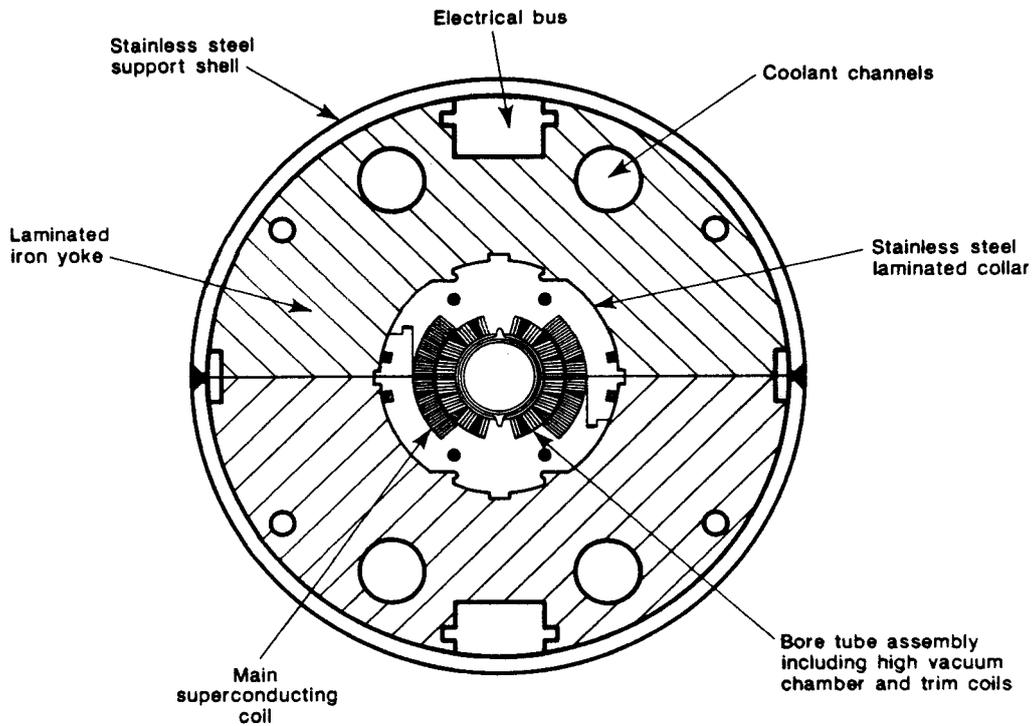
Cross section of dipole magnet cold mass, including beam tube, coil winding, collars, iron yoke, and yoke support shell.
